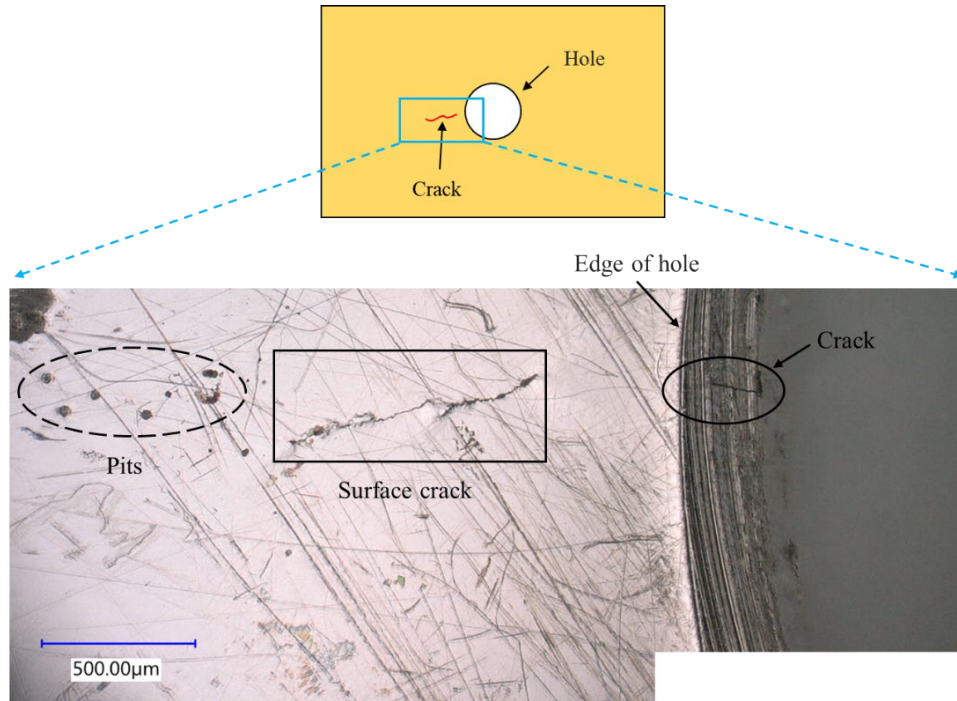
Optical image of the crack and pits on sample surface. The schematic drawing is used for better understanding of the location of surface crack. Dash oval indicates some pitting sites, solid rectangle indicates surface crack and solid oval shows the crack in the middle region of the edge of the hole.
